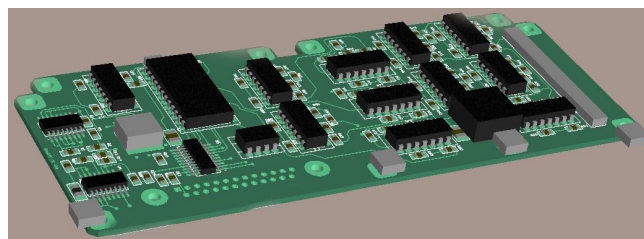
3D CAD view of FE PCB using the adopted scheme.
